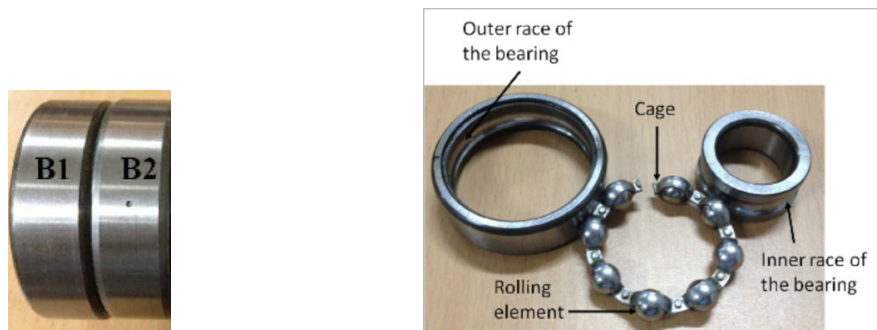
(a) A healthy bearing (B1) and faulty bearing (B2, 2 mm hole drilled through the outer race) and; (b) Disassembled view of 6204-Zz.
